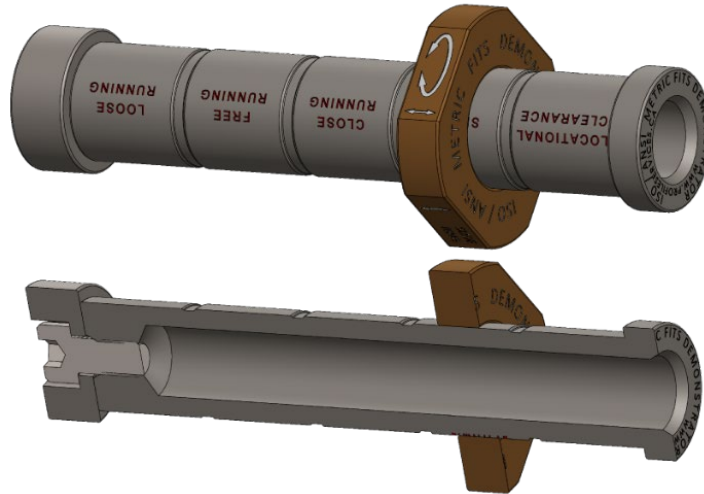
Fits Demonstrator – Concept 8 (including section view)
